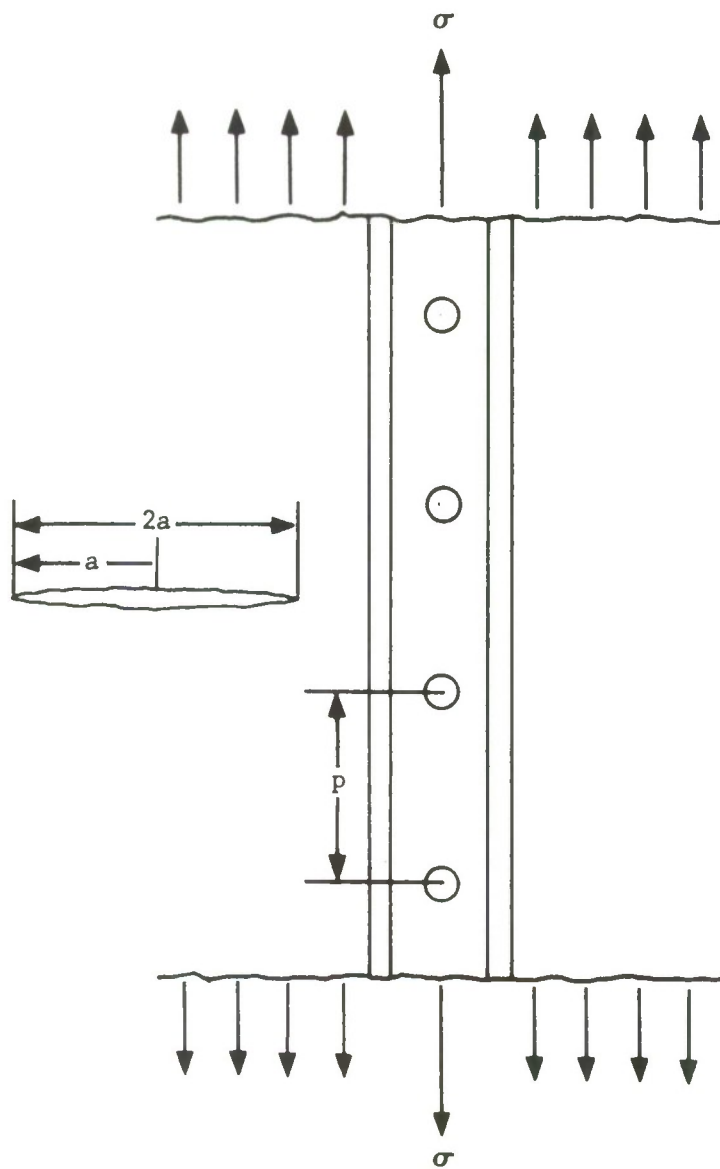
NONSYMMETRIC CRACK IN RIVETED PANEL - UNIAXIAL LOADING
